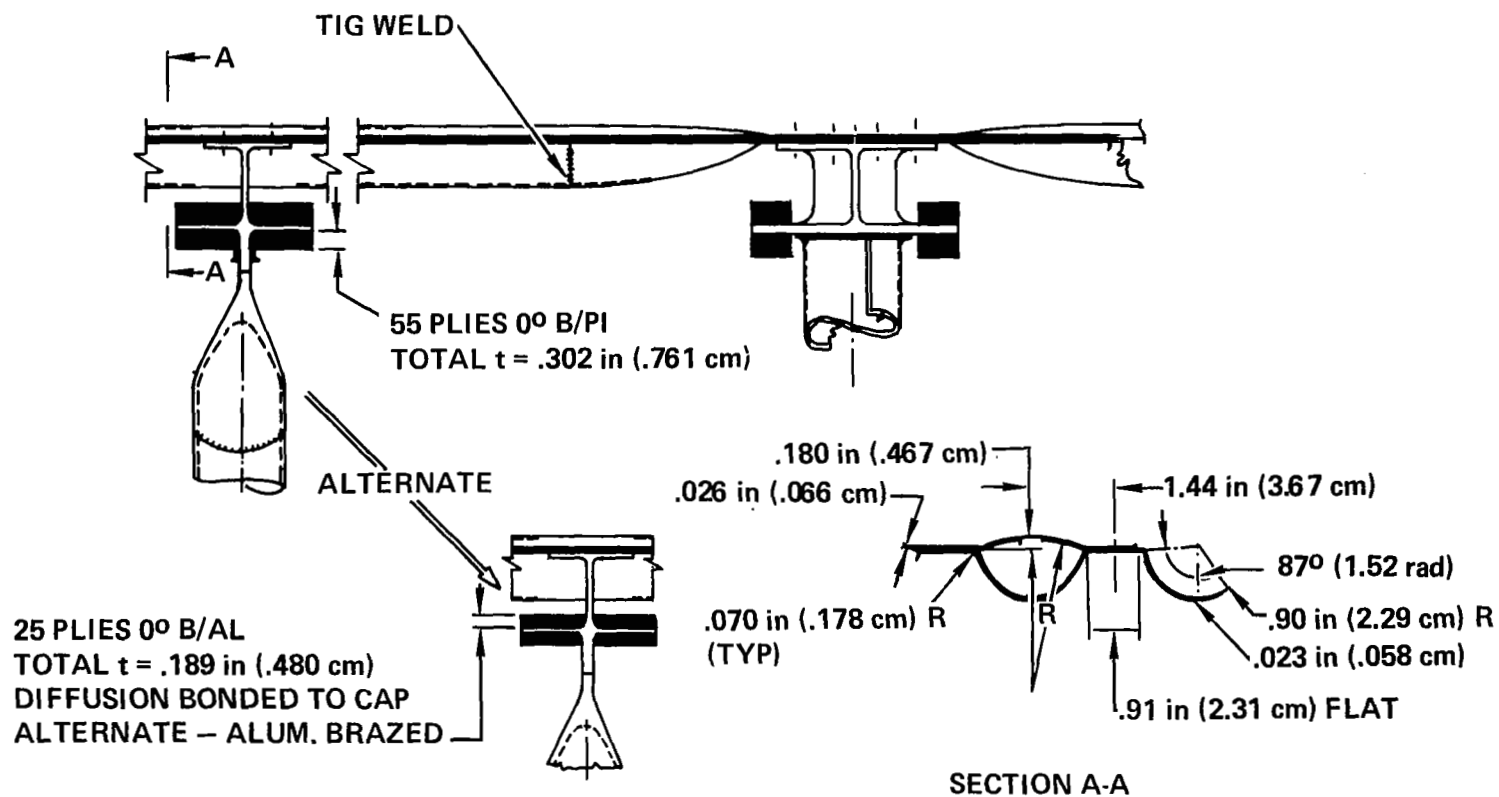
Structural Details for Chordwise-Stiffened Surfaces
